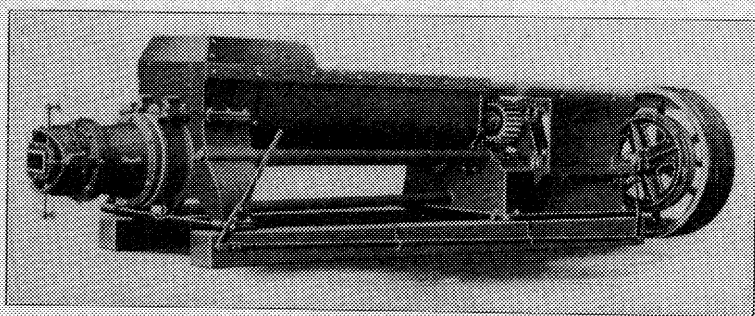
Combined Pug Mill and Auger Machine, as built by the J. D. Fate Co.
